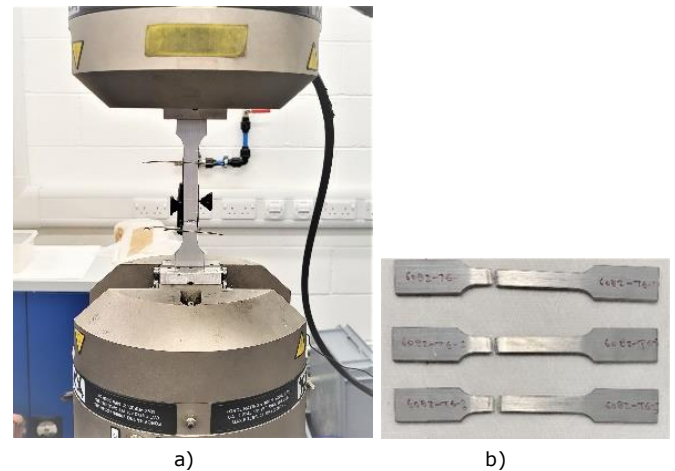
a) 6082-T6-M1 coupon after tensile fracture and b) all coupons after monotonic tensile testing.
